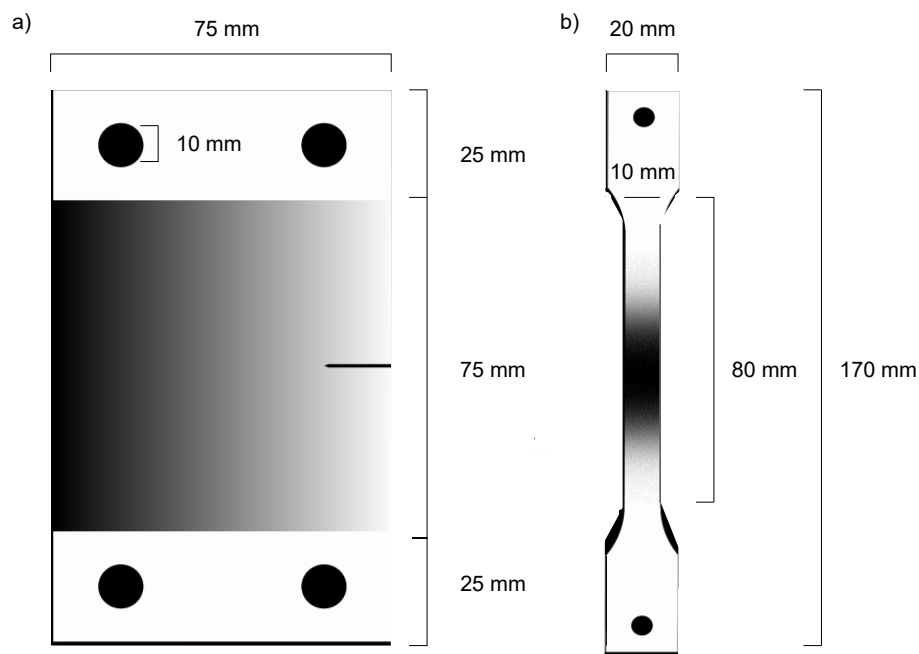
Dimensions of the samples for the fracture and tensile tests
